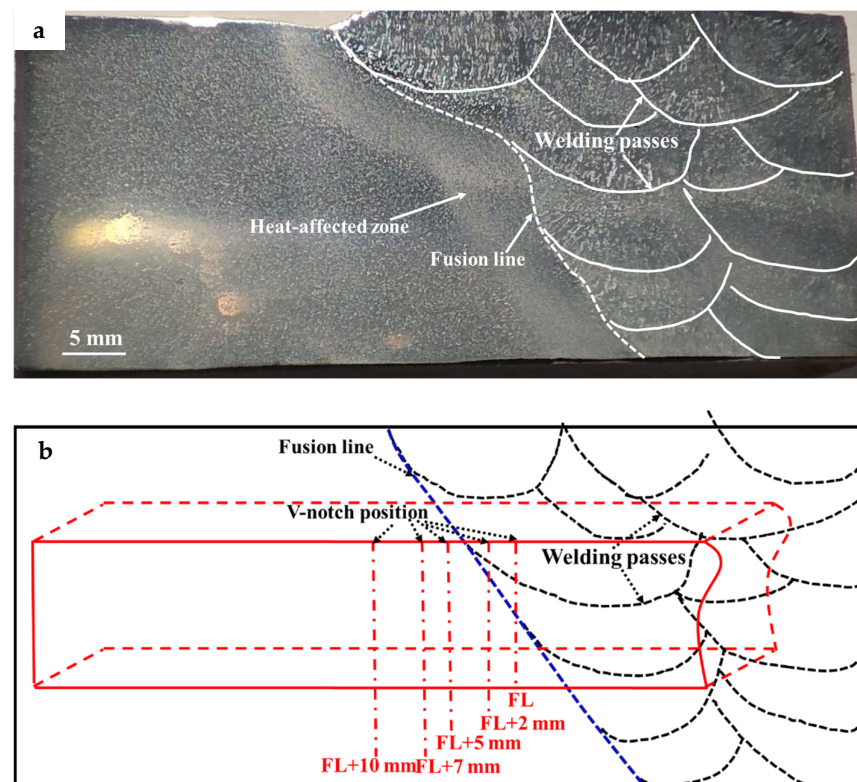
Real (a) and schematic (b) images showing the studied part of the multi-pass SAW welded joint.
